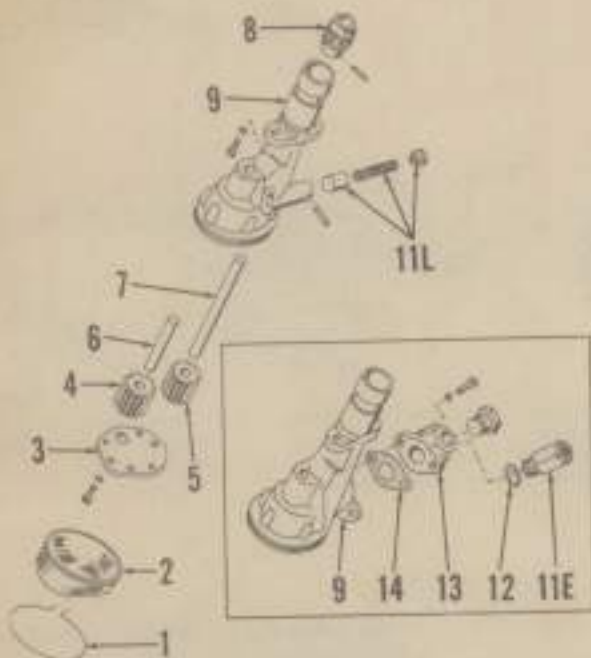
Exploded view of D-15 diesel engine oil pump. Relief valve (11E) is early type, (11L) is late type. Refer to Fig. 54 for legend.
